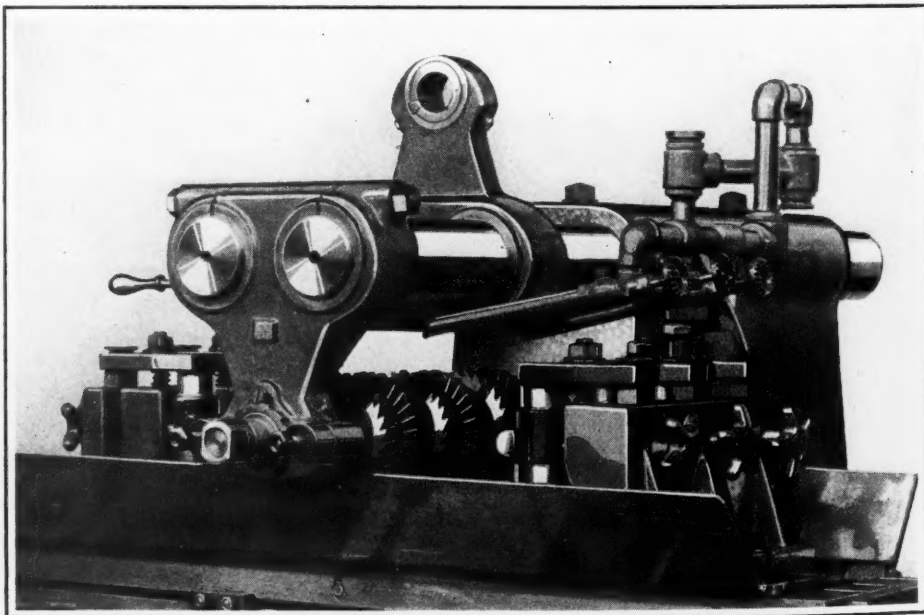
Set-up for Milling Universal Joint Housings Shown in Fig. 5
